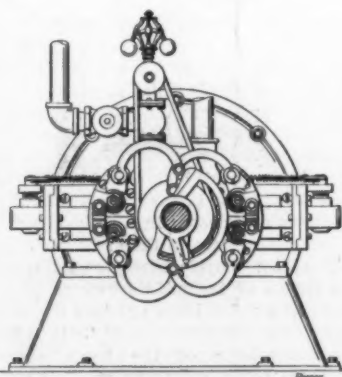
END VIEW OF ENGLUND ROTARY ENGINE.
